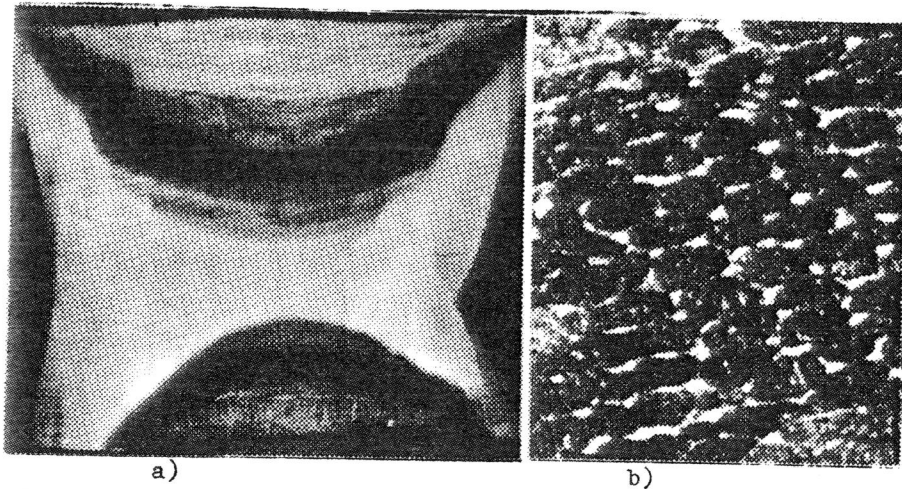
TIG weldment of 18 Ni maraging steel;
